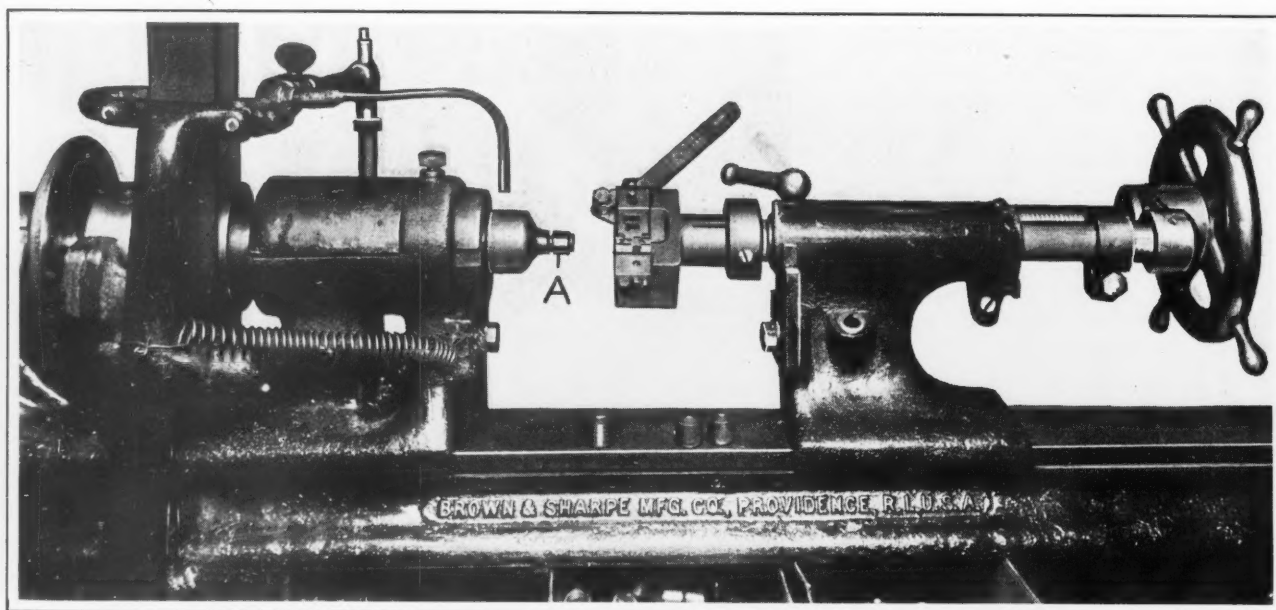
Screw Machine equipped for turning and grooving Brass Pistons
